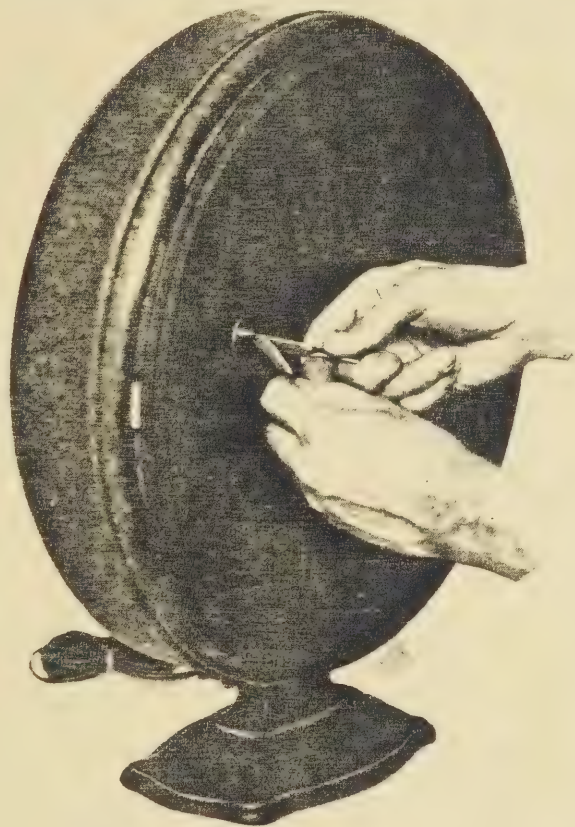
REMOVING CONE, MODELS E AND E-2.
